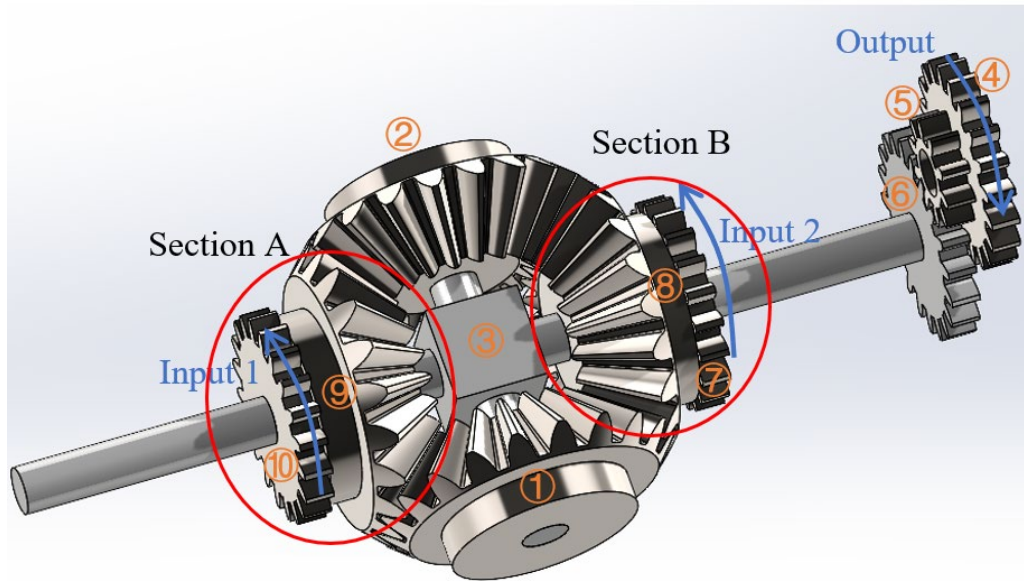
The modeling of a mechanical adder. Components are indicated with serial numbers. The rotation of the shaft  $\theta_{shaft}$  can be derived as
